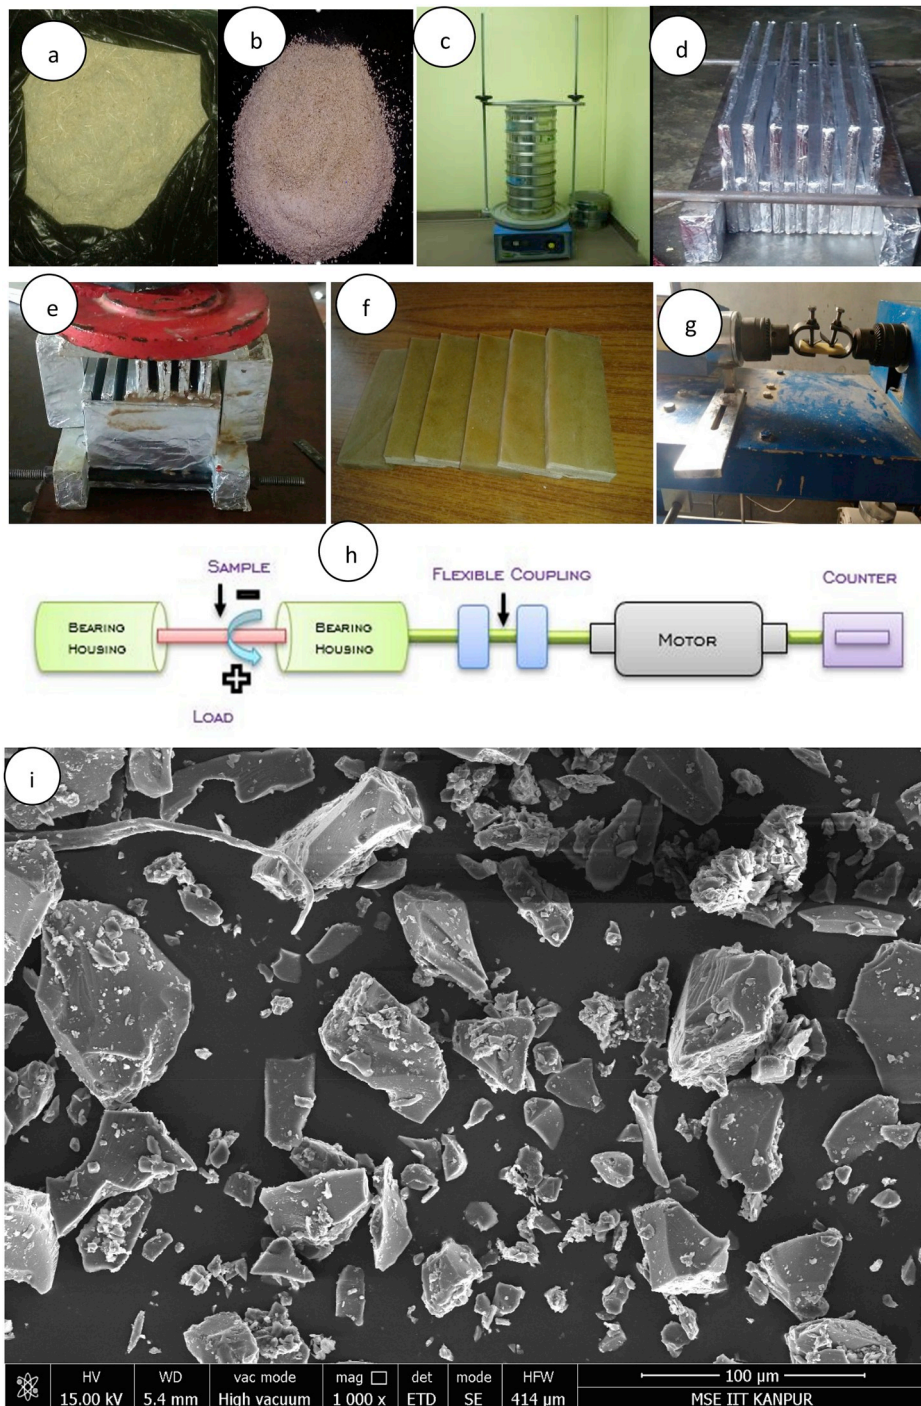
(a) Untreated bagasse particles (b) Treated bagasse particles (c) Sieve analysis apparatus (d) Specially designed mould (e) Sample curing in mould under steady load (f) SFRPC samples (g) Fatigue testing machine with fixture holding SFRPC sample before fatigue testing (h) Block diagram of fatigue testing setup (i) SEM micrograph of BPs.
